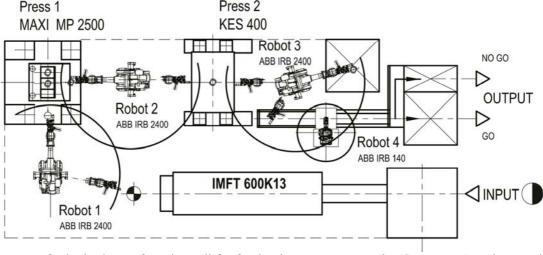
Layout of robotized manufacturing cell for forging in Zastava Kovacnica Company. A variant version with integrated final forging geometry control system using universal manipulation robot IRB 1400, mfd. by ABB
